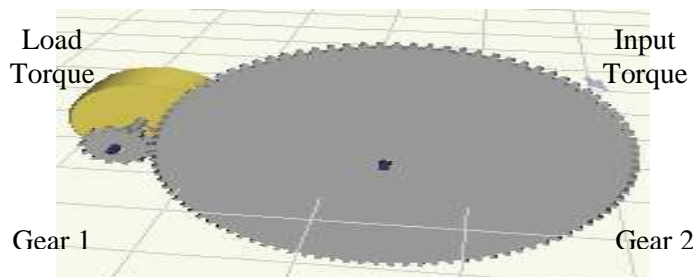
b): Gear System Used for Increasing Generator Rotation Speed.
